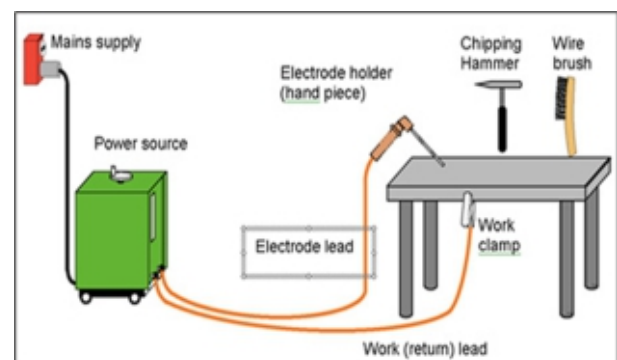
Shielded Metal Arc Welding/ Manual Metal Arc Welding
